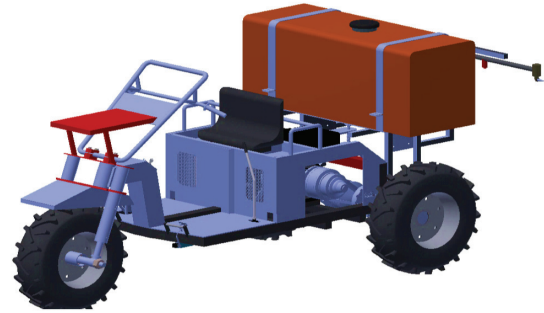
The Three-wheel type machine with a solar charging and electric spraying system.
